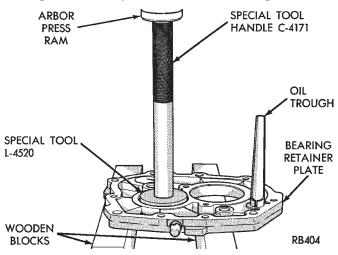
Remove Input Shaft Rear Bearing Cup CAUTION: Bolt on bearing support plate before installing input shaft rear bearing cup.
